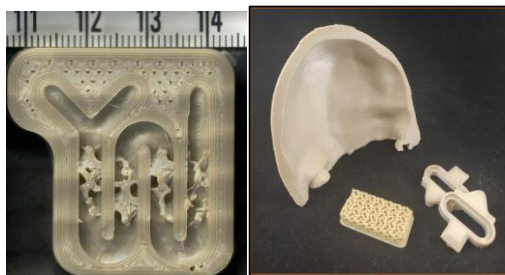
PEEK pharmaceutical reactor which incorporate mixers printed at 440°C. This reactor design is used to help evaluate the geometric accuracy of the prints. The image on the right is photograph of a 3D printed cranial implant device demonstrator.
